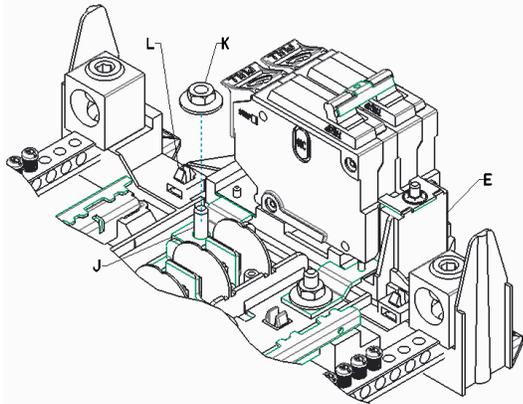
Assemble the conversion kit with breaker to the load center interior.
